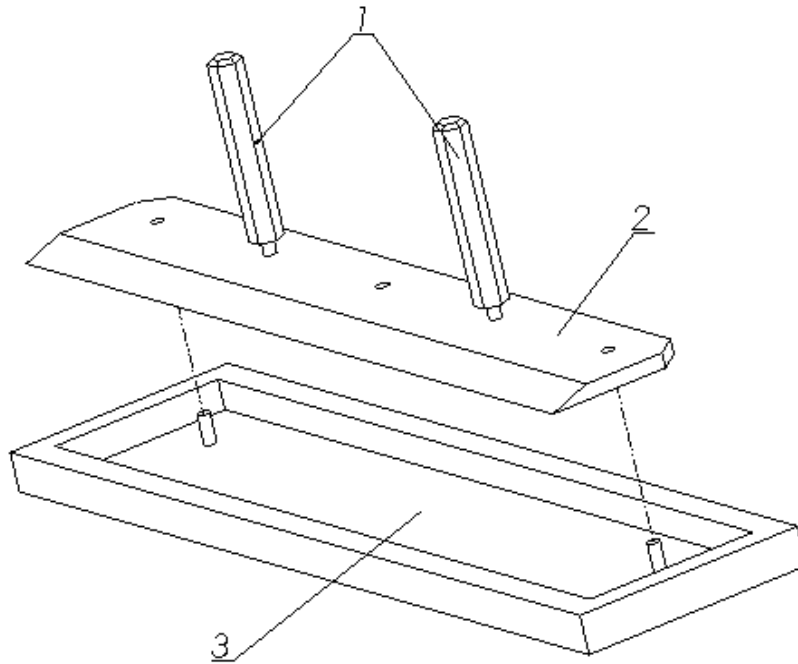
B- adjusting screw 1 is higher then knife bar lobe 2 – incorrect position, screw must be unscrewed.
